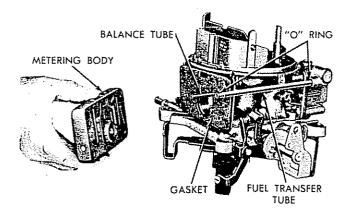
ADJUSTING BALANCE TUBE MODEL 4160
